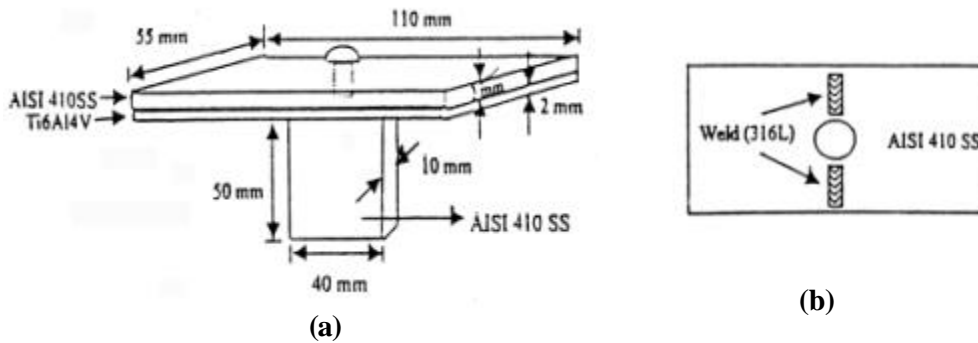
Mock-up for welding of the shroud at a location where blade and understrap are riveted: (a) mock-up assembly; and (b) top view of the assembly after welding.
